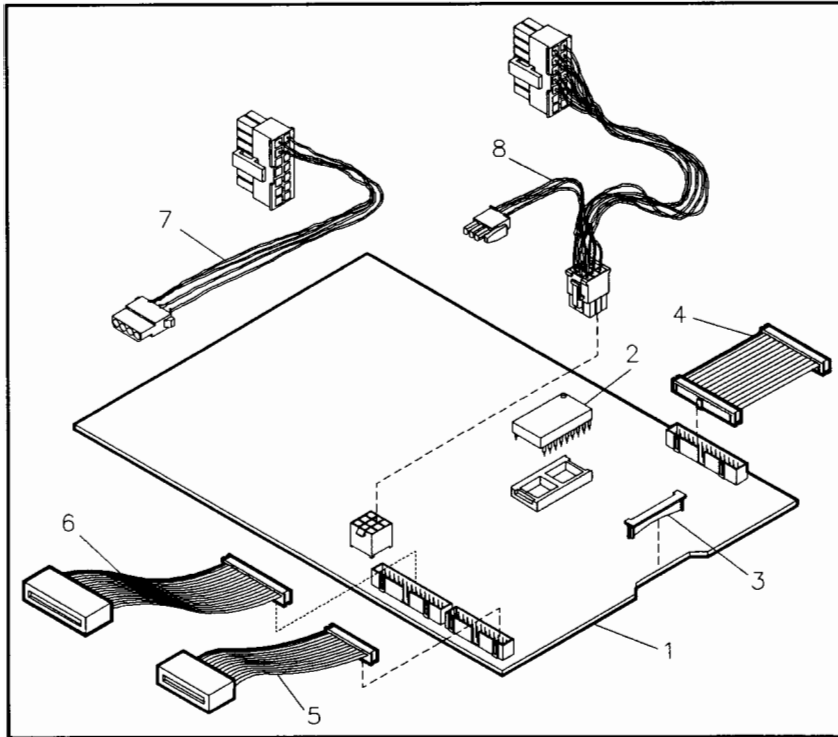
Model 670XP Controller PCA and Cabling, Exploded View
